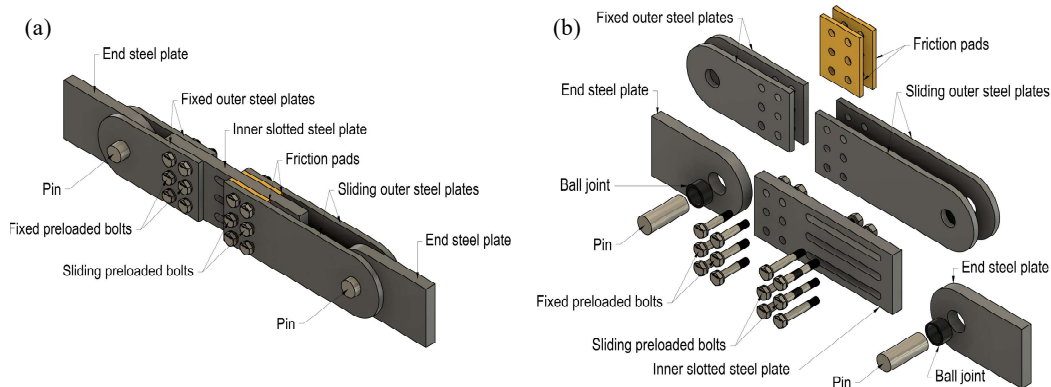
Idealized sliding friction damper: (a) 3D view of the damper assembly, (b) extruded 3D view
